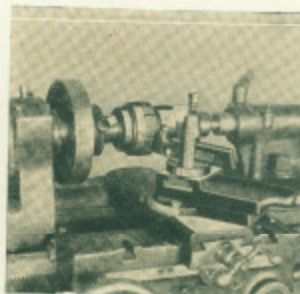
Cutting a Screw Thread on a Bearing Retaining Collar
